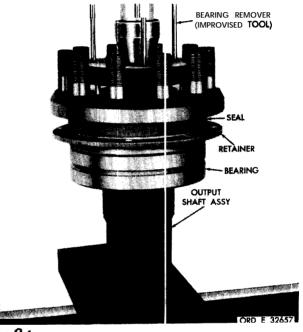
Removing bearing, retainer and seal from output shaft assembly
